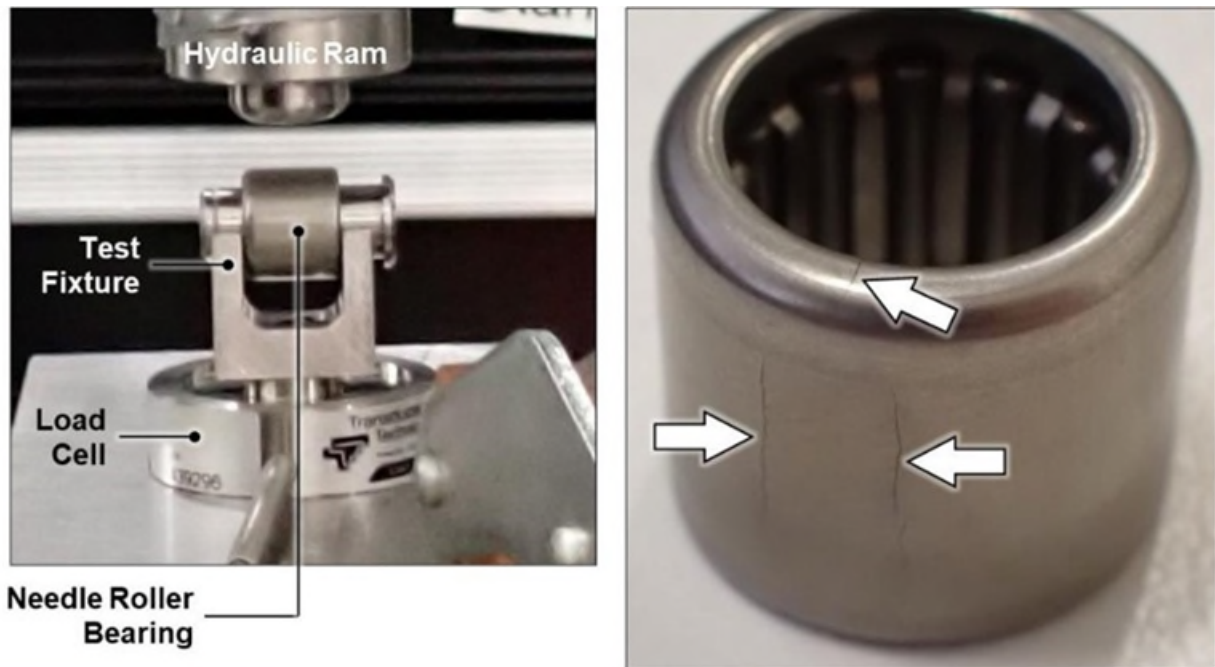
Needle Roller Bearing Load Test Fixture (Left). Hairline fractures in test bearing (Right).
